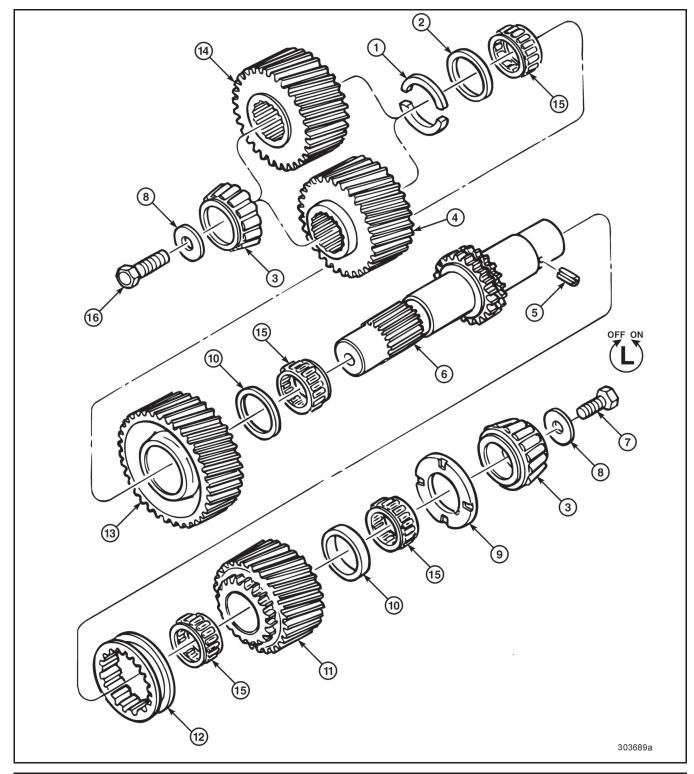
Installing Hi-Range Gear Bearings and Spacer
